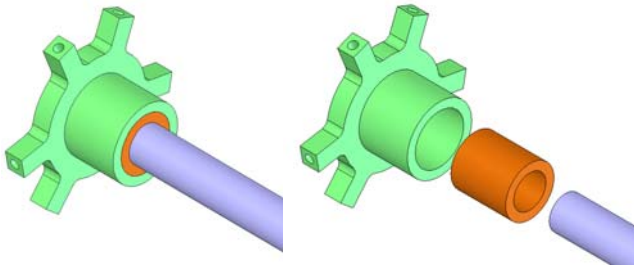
Slip-clutch hub design assembled (left) and exploded (right)
